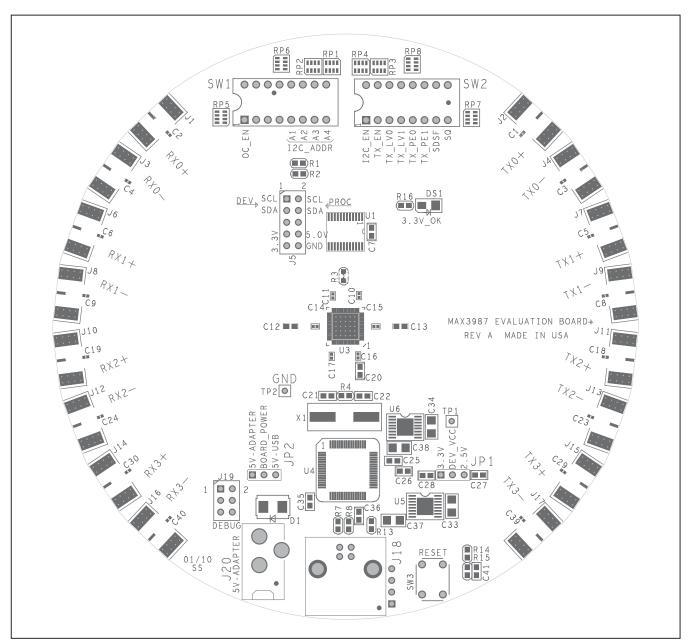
MAX3987 EV Kit Component Placement Guide—Component Side (Sheet 1 of 2)
